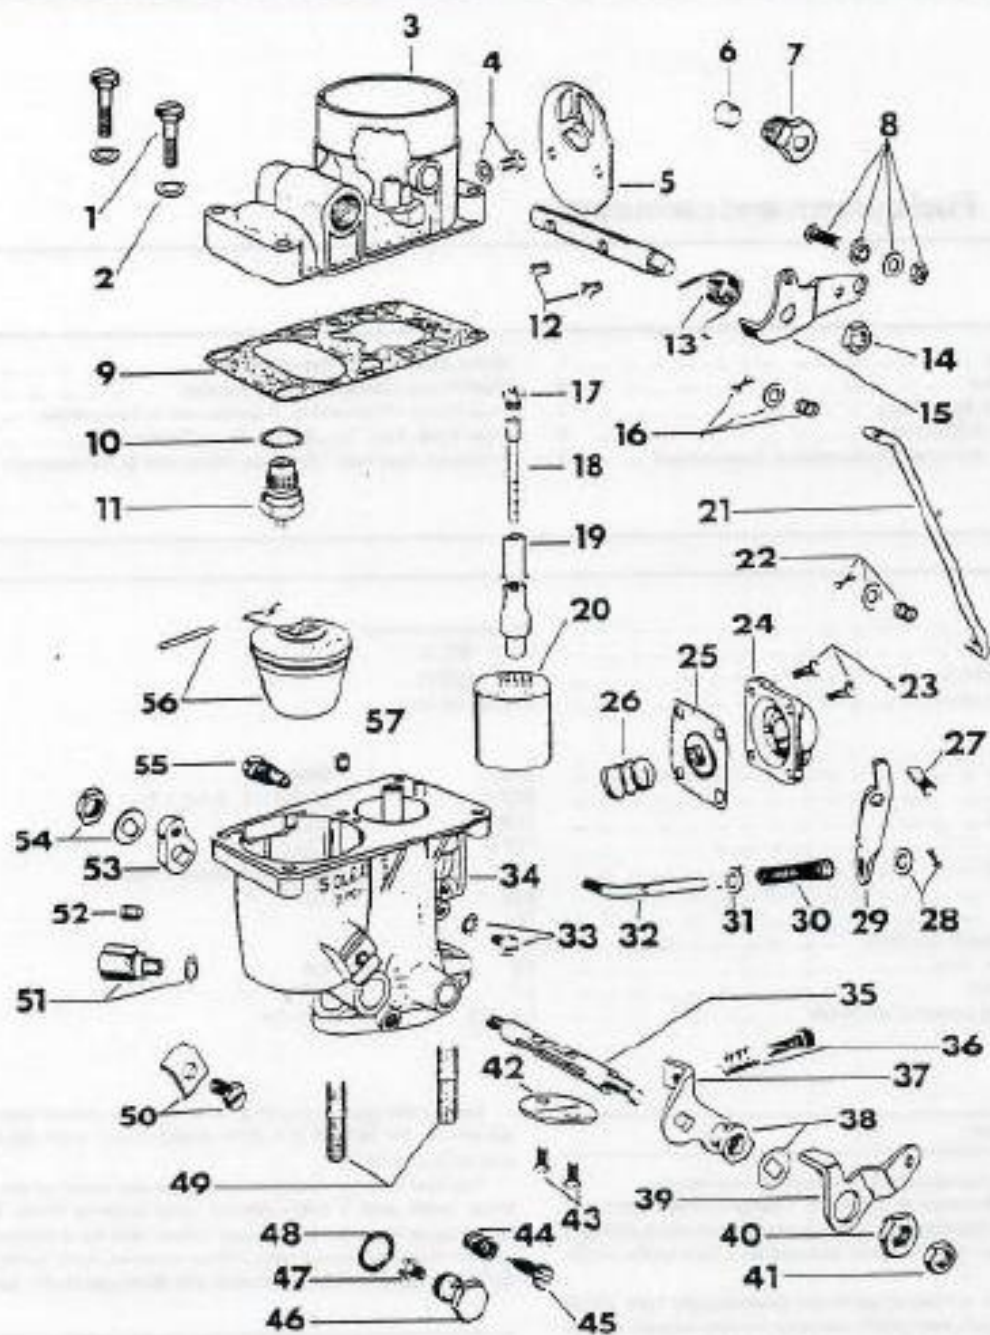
SOLEX 28 PCI CARBURETTOR - EXPLODED VIEW
